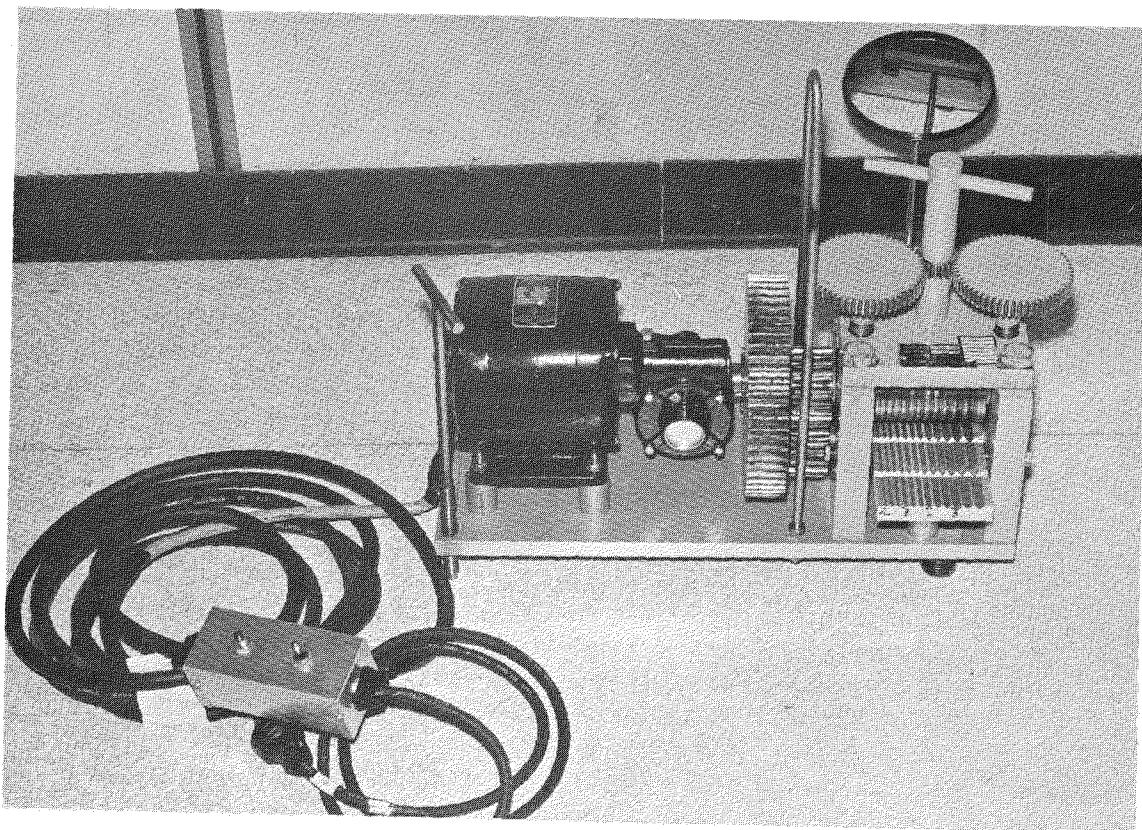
WIRE ROLLING MILL WITH GROOVED GUIDE PLATES
